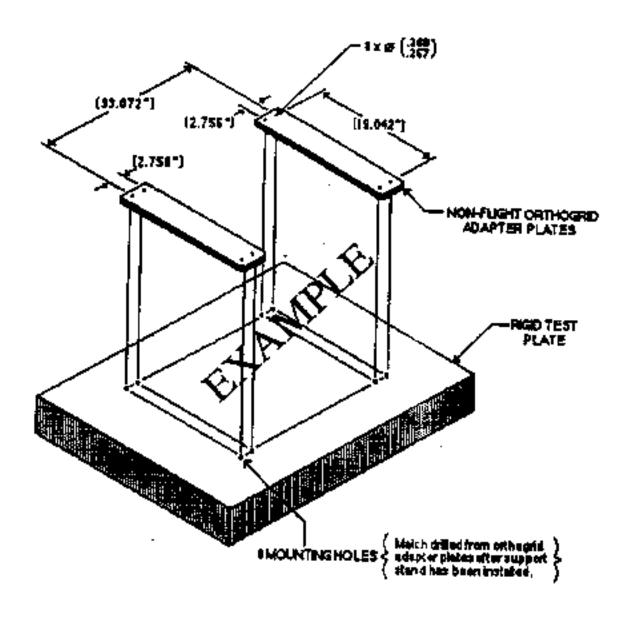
ACCELEROMETER LOCATIONS FOR ALAE/CMU SUPPORT STAND ASSEMBLY TEST (SHEET 3 OF 3)
